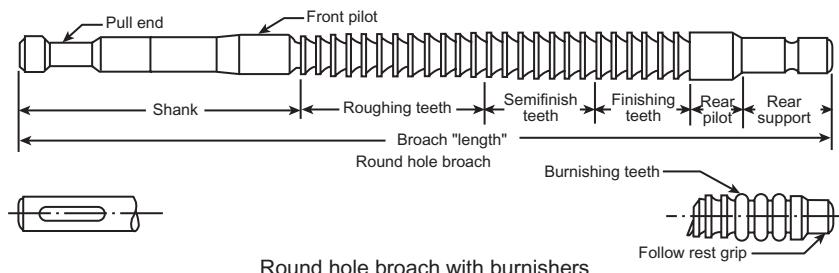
Nomenclature of a typical round pull broach. Courtesy: American Broach and Machine Division, Sundstrand Machine Tools Company.
